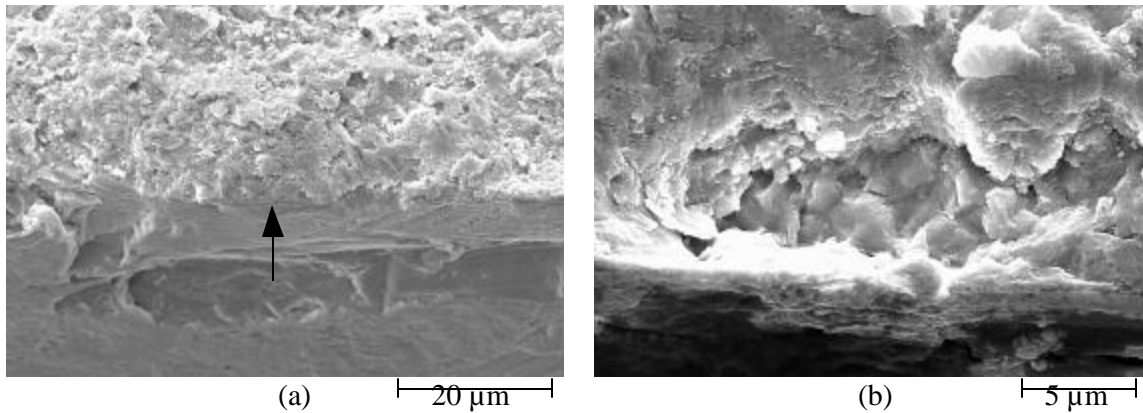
Fracture surface photos showing presence of (a) fretting debris particles and (b) material smearing.
